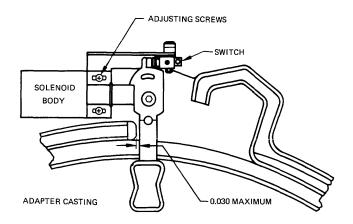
Retracted Solenoid Plunger and Lock-Arm Clearance
